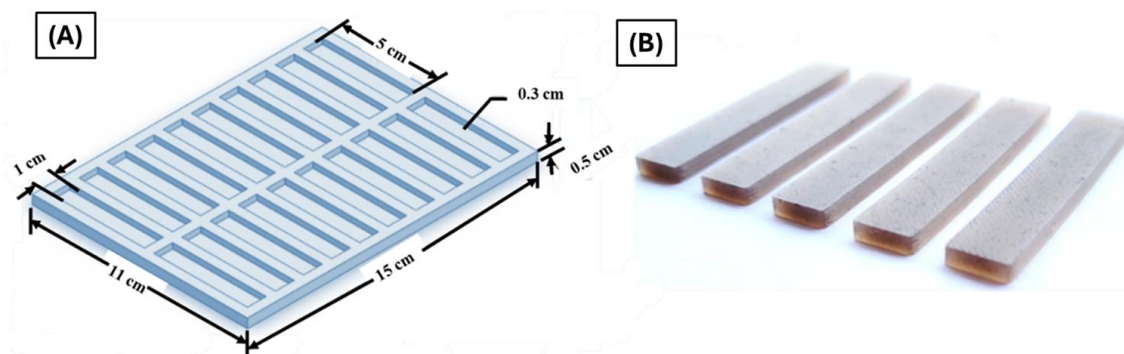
Schematic of the designed mold for fabricating sample coupons in (A) and fabricated test coupons in (B)
